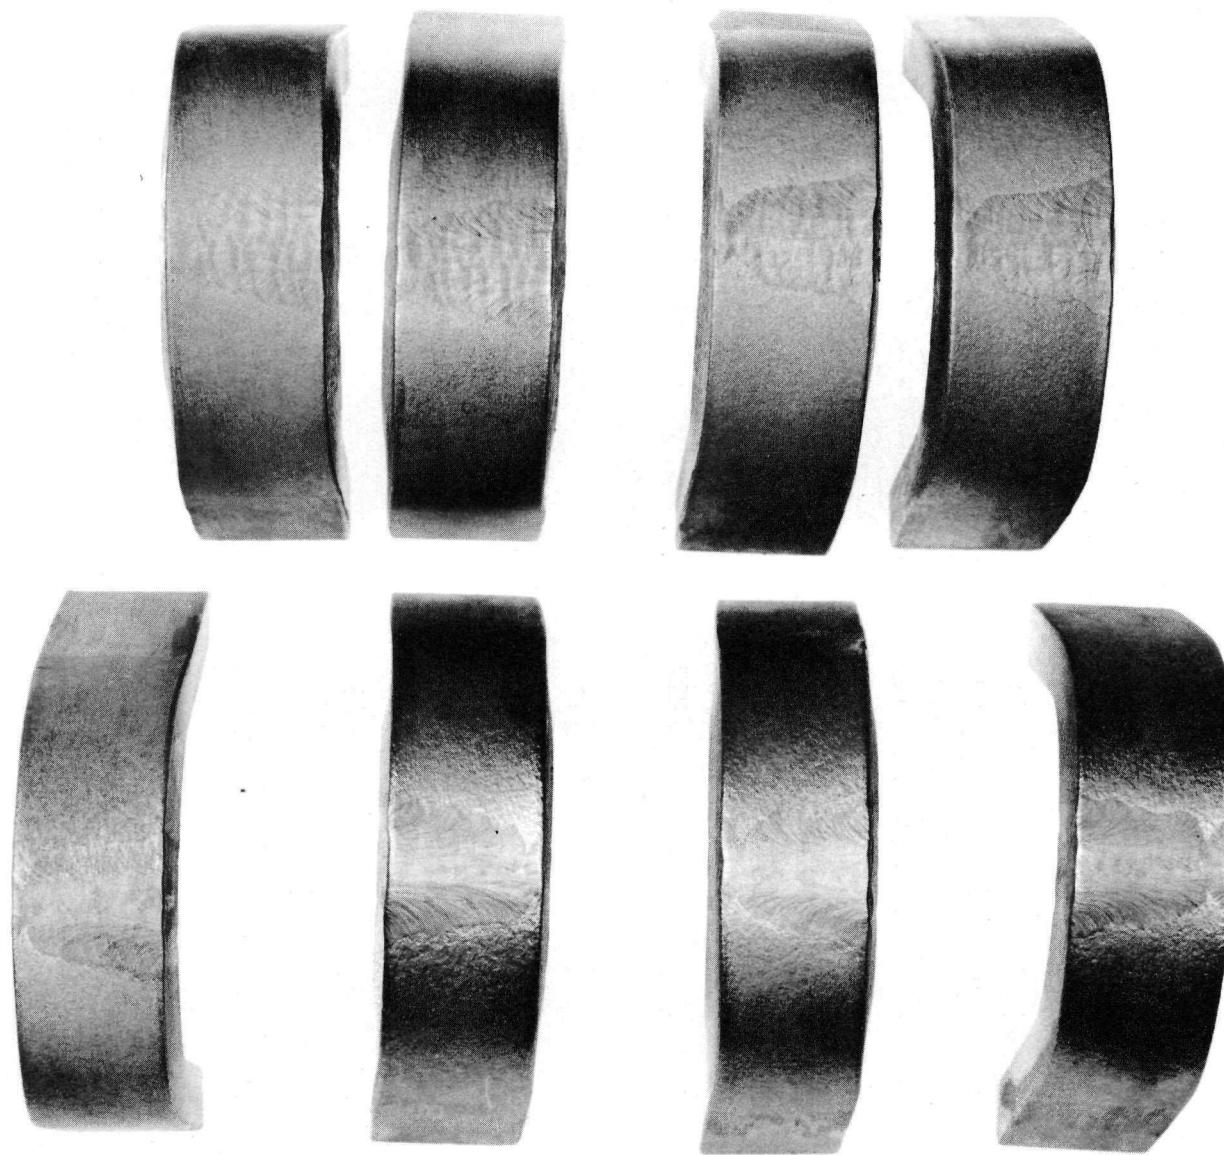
Side Bend Weld Qualification Test Specimens
